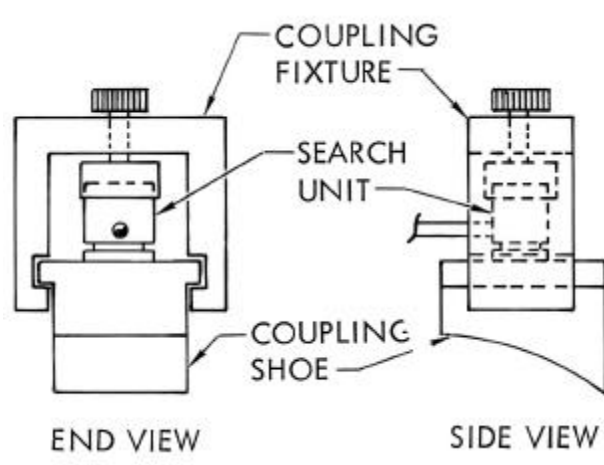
Use of a Coupling Fixture to Hold Search Unit on Shoe.
